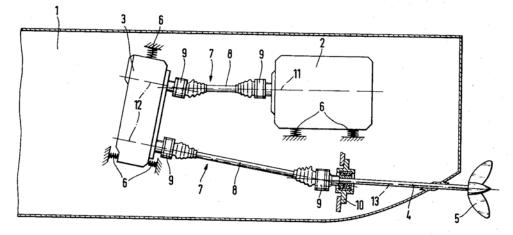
Flexibly mounted drive arrangement for ships [1].
